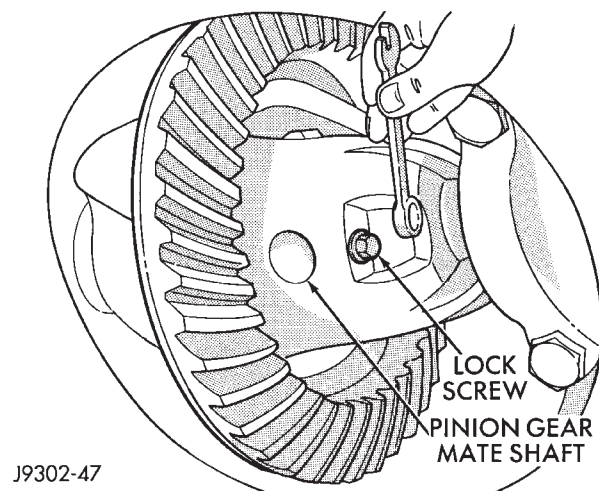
Pinion Gear Mate Shaft Lock Screw
